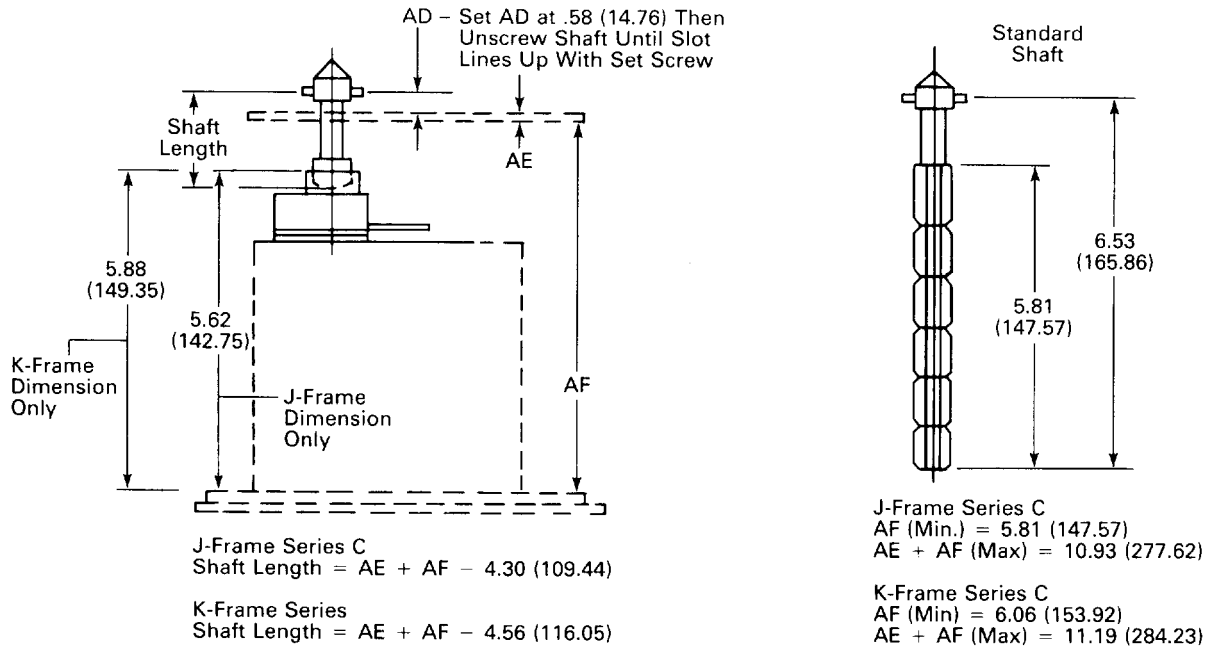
Securing Circuit Breaker and Handle Mechanism to Mounting Surface
